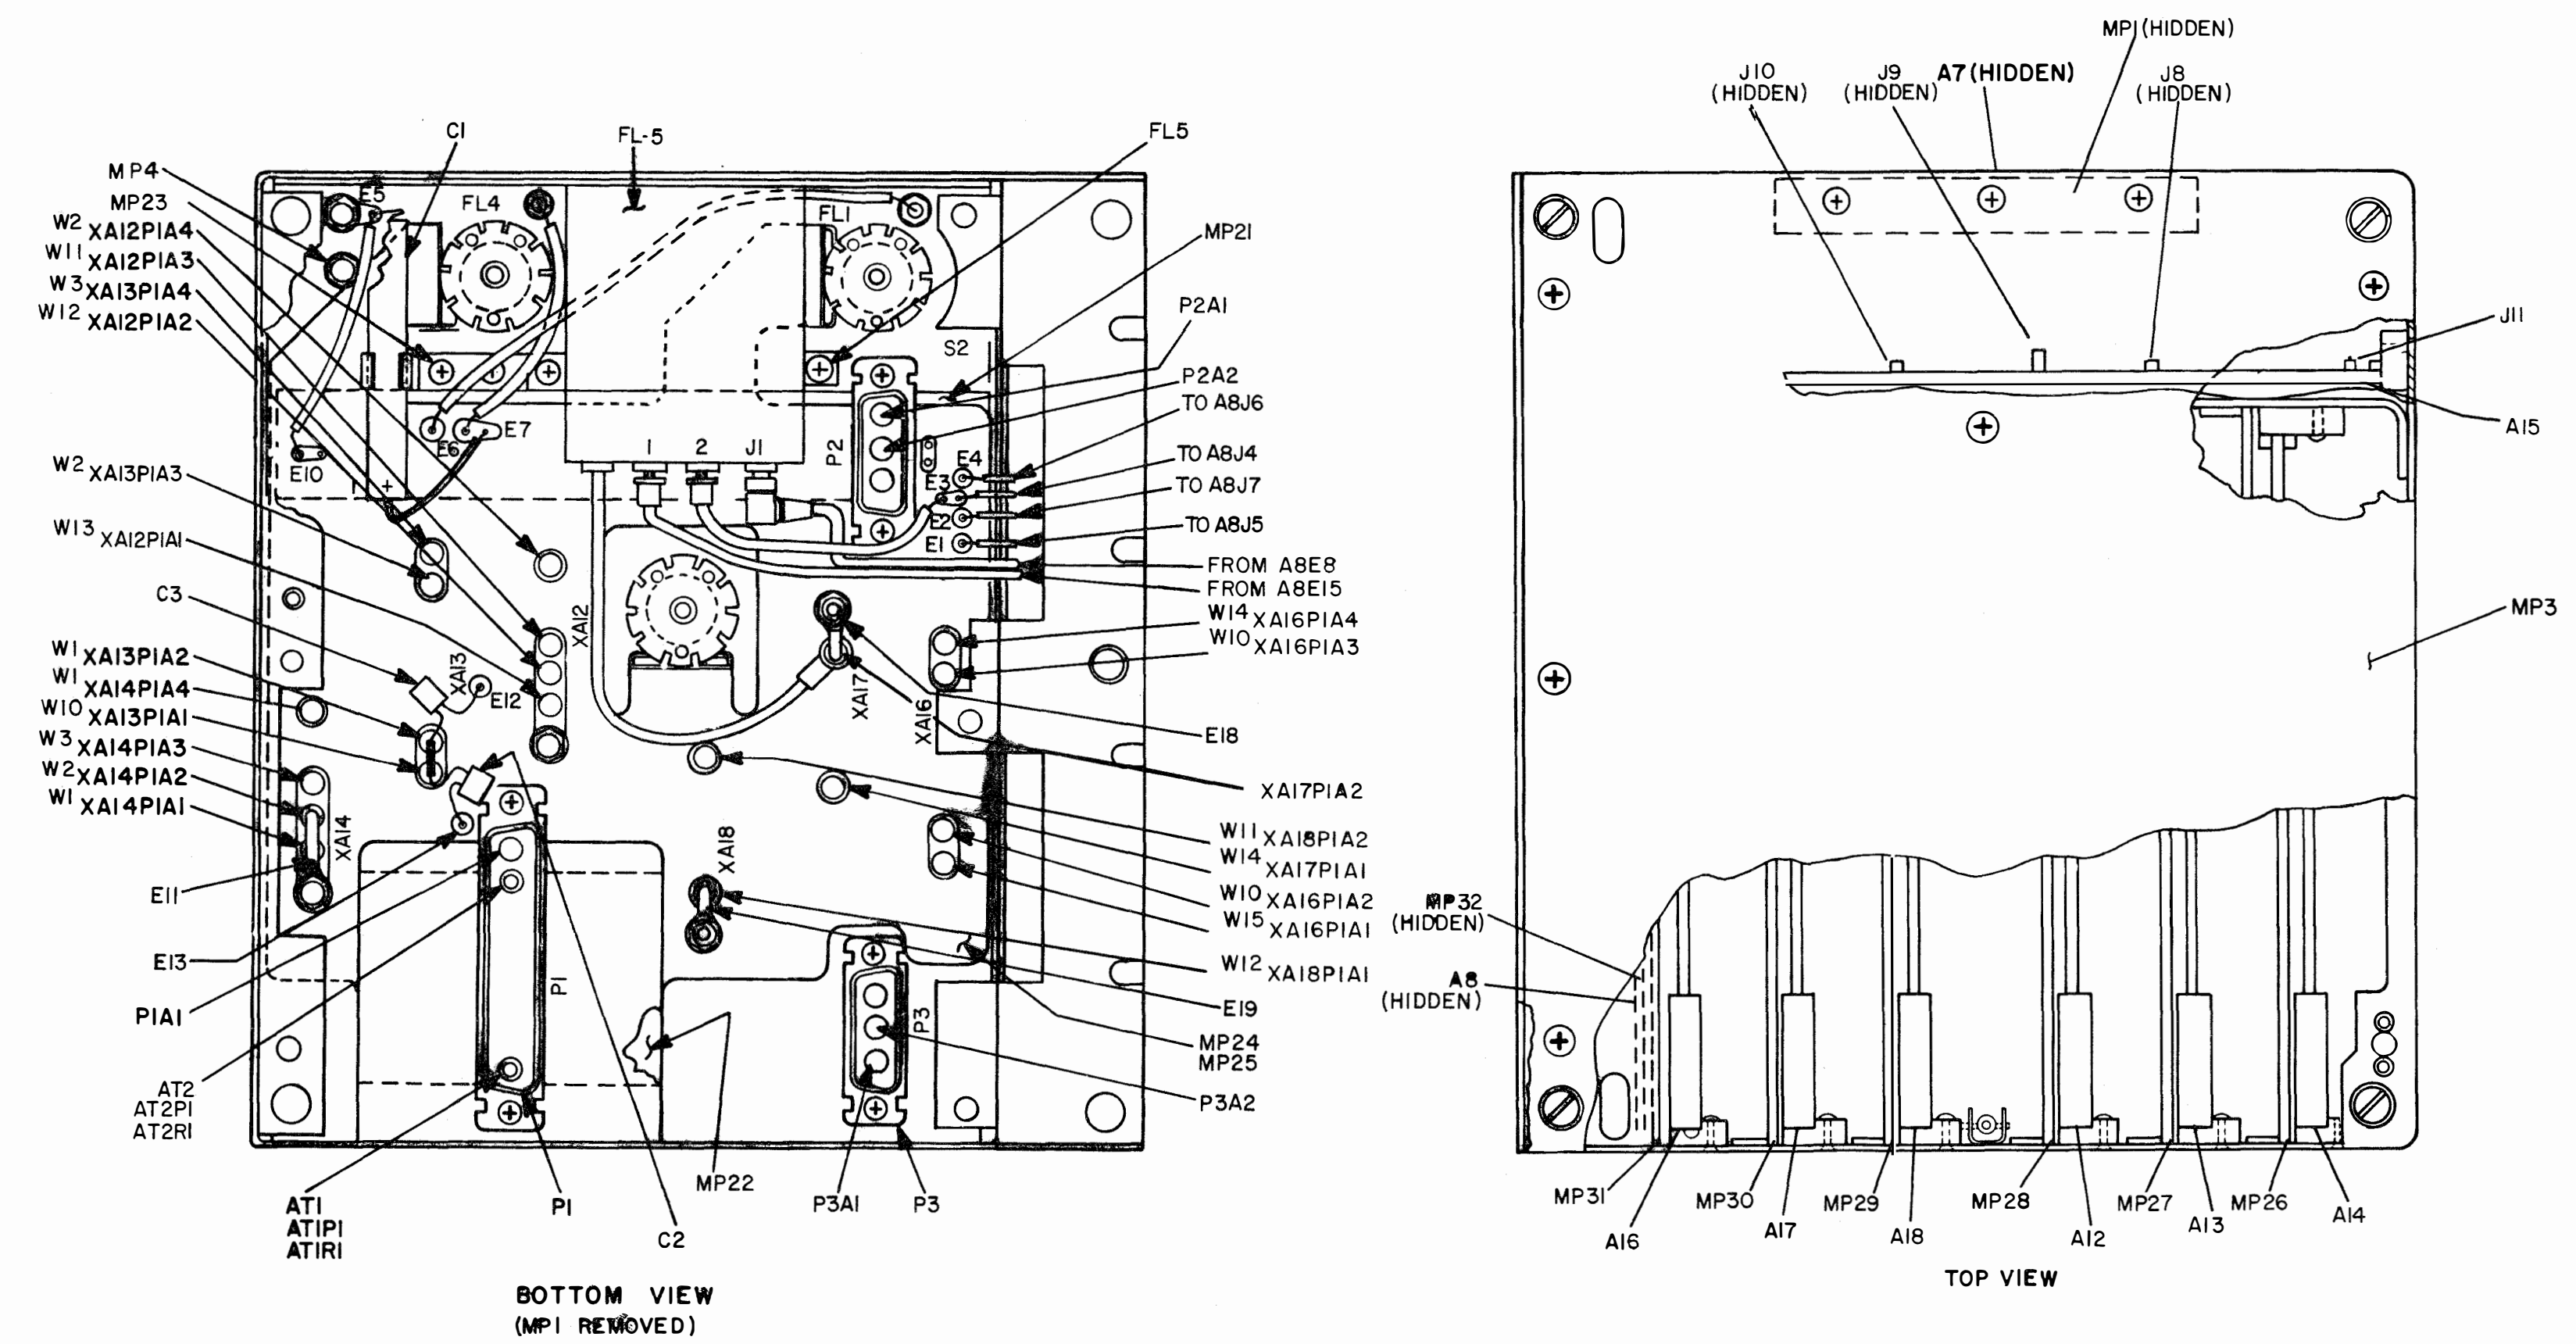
Translator/Synthesizer Assembly A2A6, Component Locations
